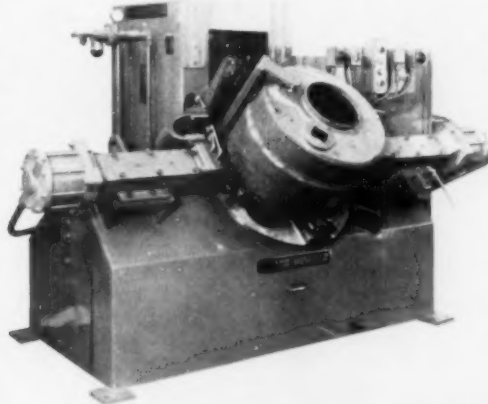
Ammunition carrier box with two handle clips, two hinge and lock clips projection welded on cover, other hardware on body. Main joints are seam welded. Production is above 500 units per hour.
